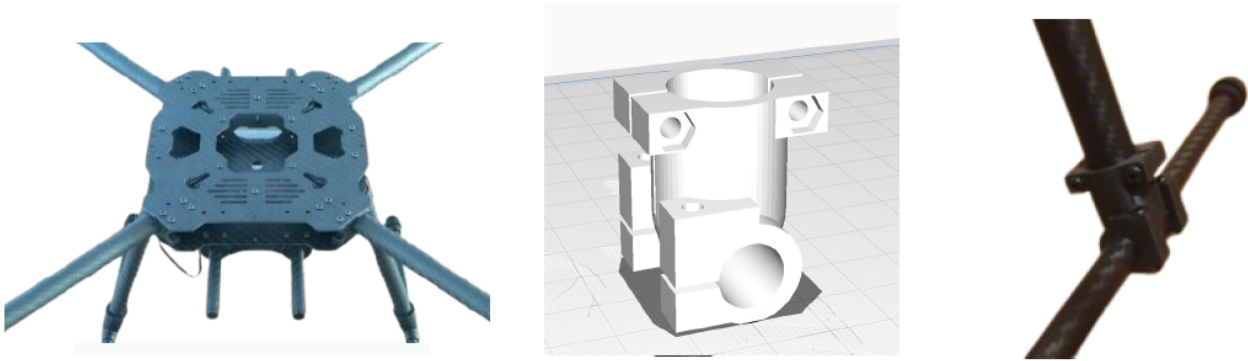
STEP 2. TAROT FRAME (LEFT); PRINTED PART LANDING GEAR (MIDDLE); LANDING GEAR (RIGHT)
